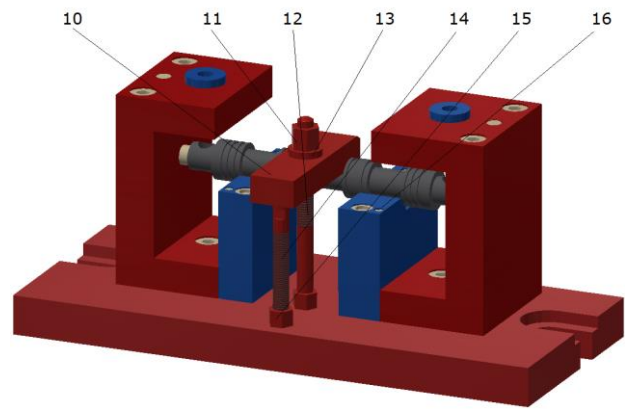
3D model of the fixturing device for the spool valve: 10 - fixing clamp; 11 - hexagon nut with collar; 12 - screwed bolt; 13 - conical hole plate; 14 - variable supporting pin; 15 - thick hexagon nut; 16 - B-type cylindrical pin.
